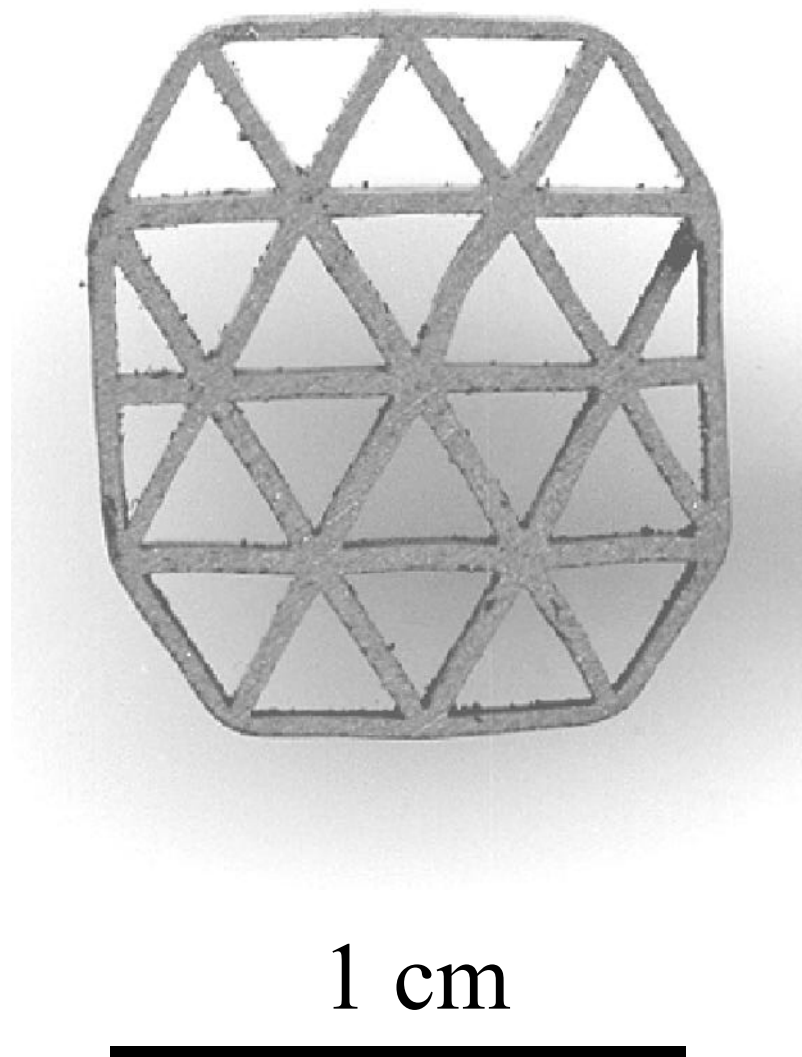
Typical section of an extruded honeycomb. Section is perpendicular to extrusion axis.
